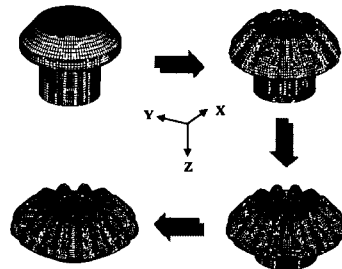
Intermediate deformations of preform workpiece in bevel gear forging
